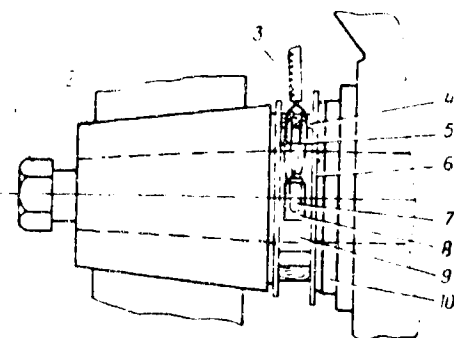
Placement of Open HE Charges on the Shaft: 1 - grip nut; 2 - propeller screw; 3 - main conducting line; 4 - wooden stays; 5 - lead shield; 6 - iron plate; 7 - detonator; 8 - charge; 9 - propeller shaft; and 10 - deadwood bushing.
